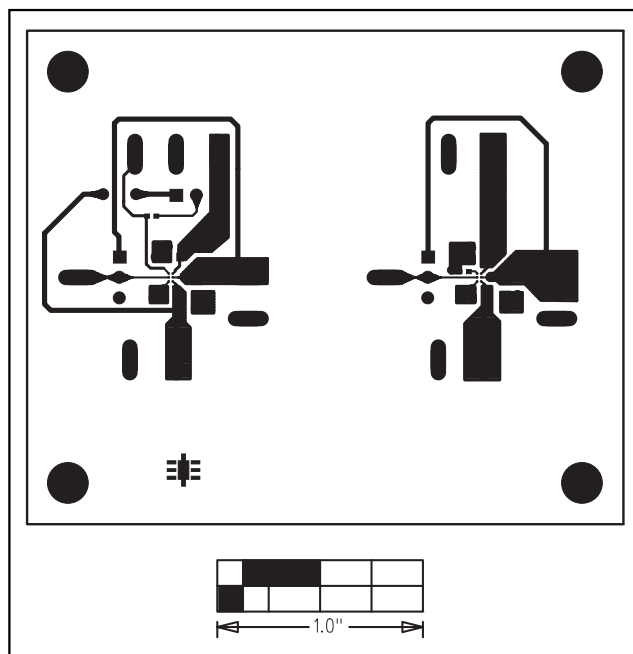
MAX8530/MAX8531 EV Kit PC Board Layout—Component Side
